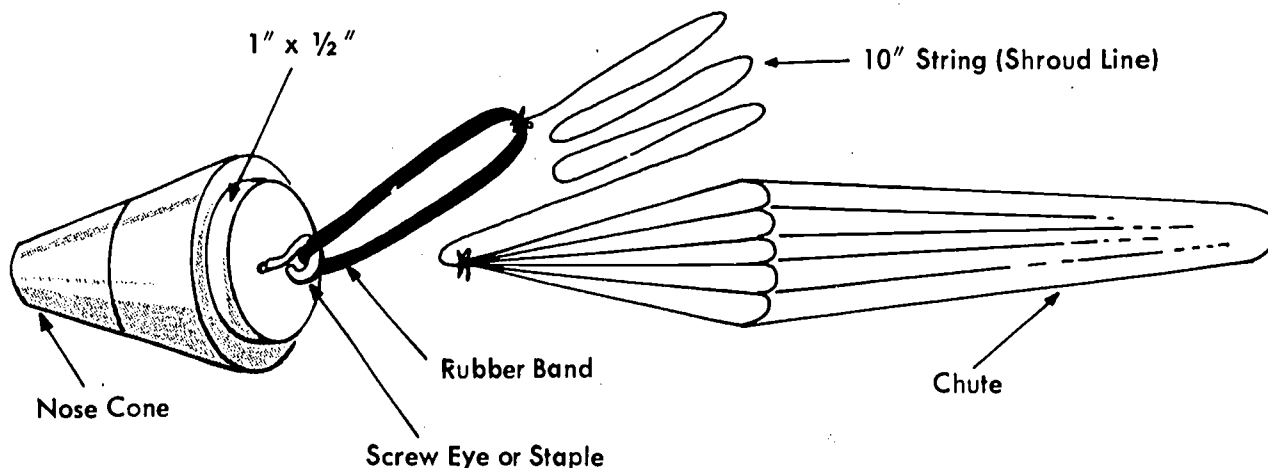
Alternate Rocket-Shock-Cord Assembly
